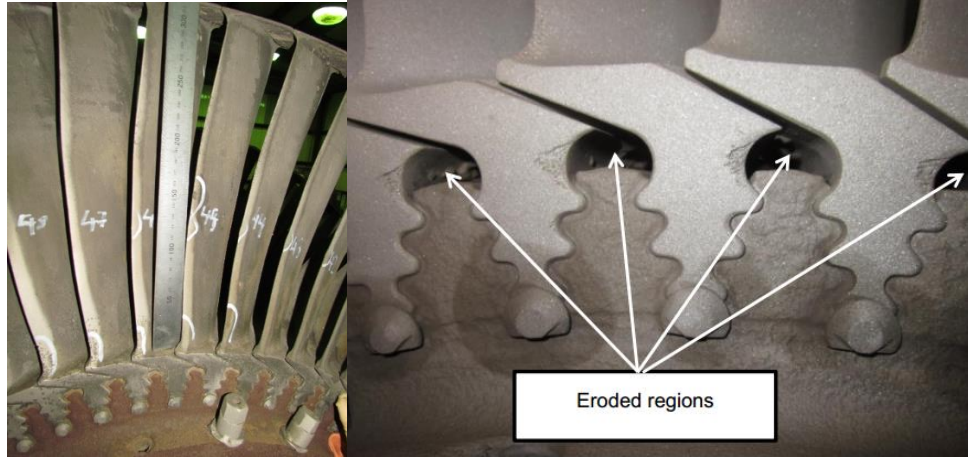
Appearance of rotor before (left) and after cleaning (right) showing material loss from top of disc blade fixing crest due to flash cavitation/wire drawing erosion.
